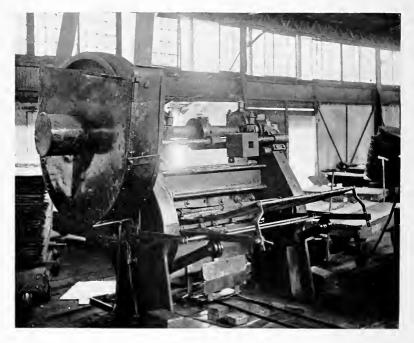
Fig. D. — Guarded wheel and belt — resquaring shears. (Courtesy of the American Sheet and Tin Plate Company.)
